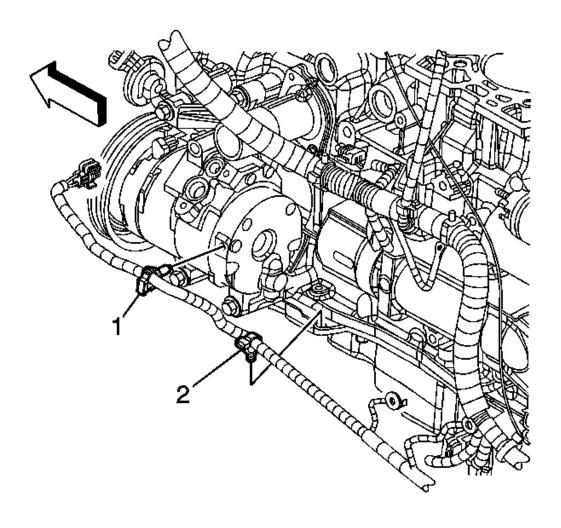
Identifying Engine Wiring Harness Retainers Courtesy of GENERAL MOTORS CORP.
